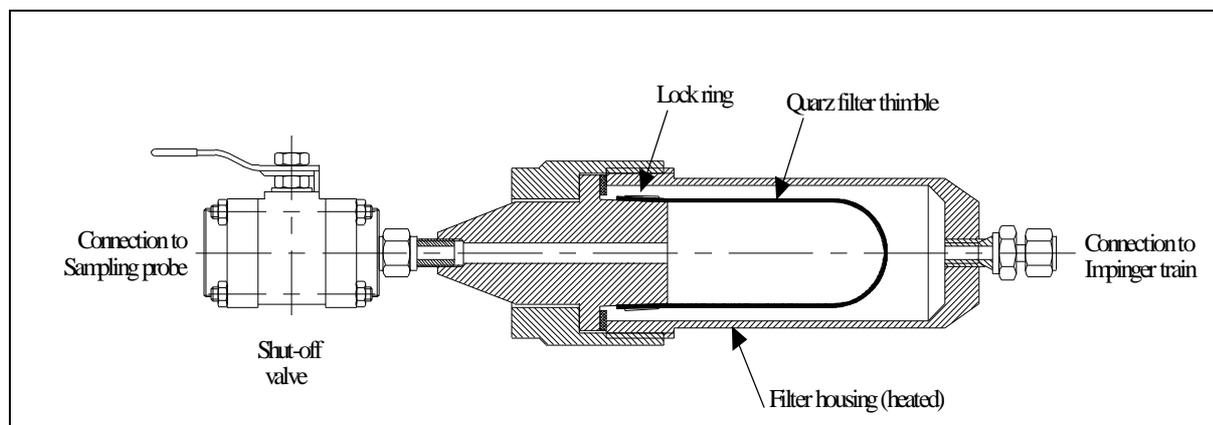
Module 2: the heated particle filter. This figure shows one of the possible ways to mount the thimble filter in the housing.
